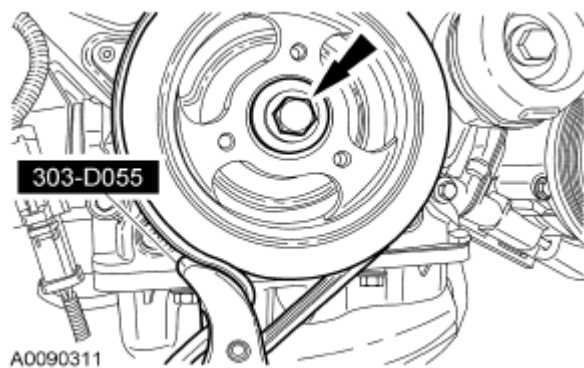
Identifying Special Tool (303-D055) And Crankshaft Pulley Bolts
